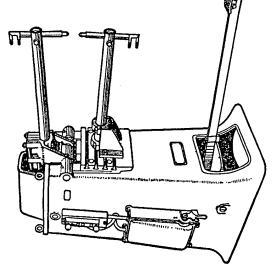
Spot-welding machine. The electrodes are brought together by means of the pedal shown in the foreground.
